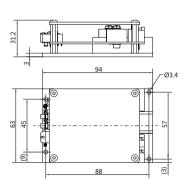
Outline drawing of DP-SP series drivers with conductive pad
